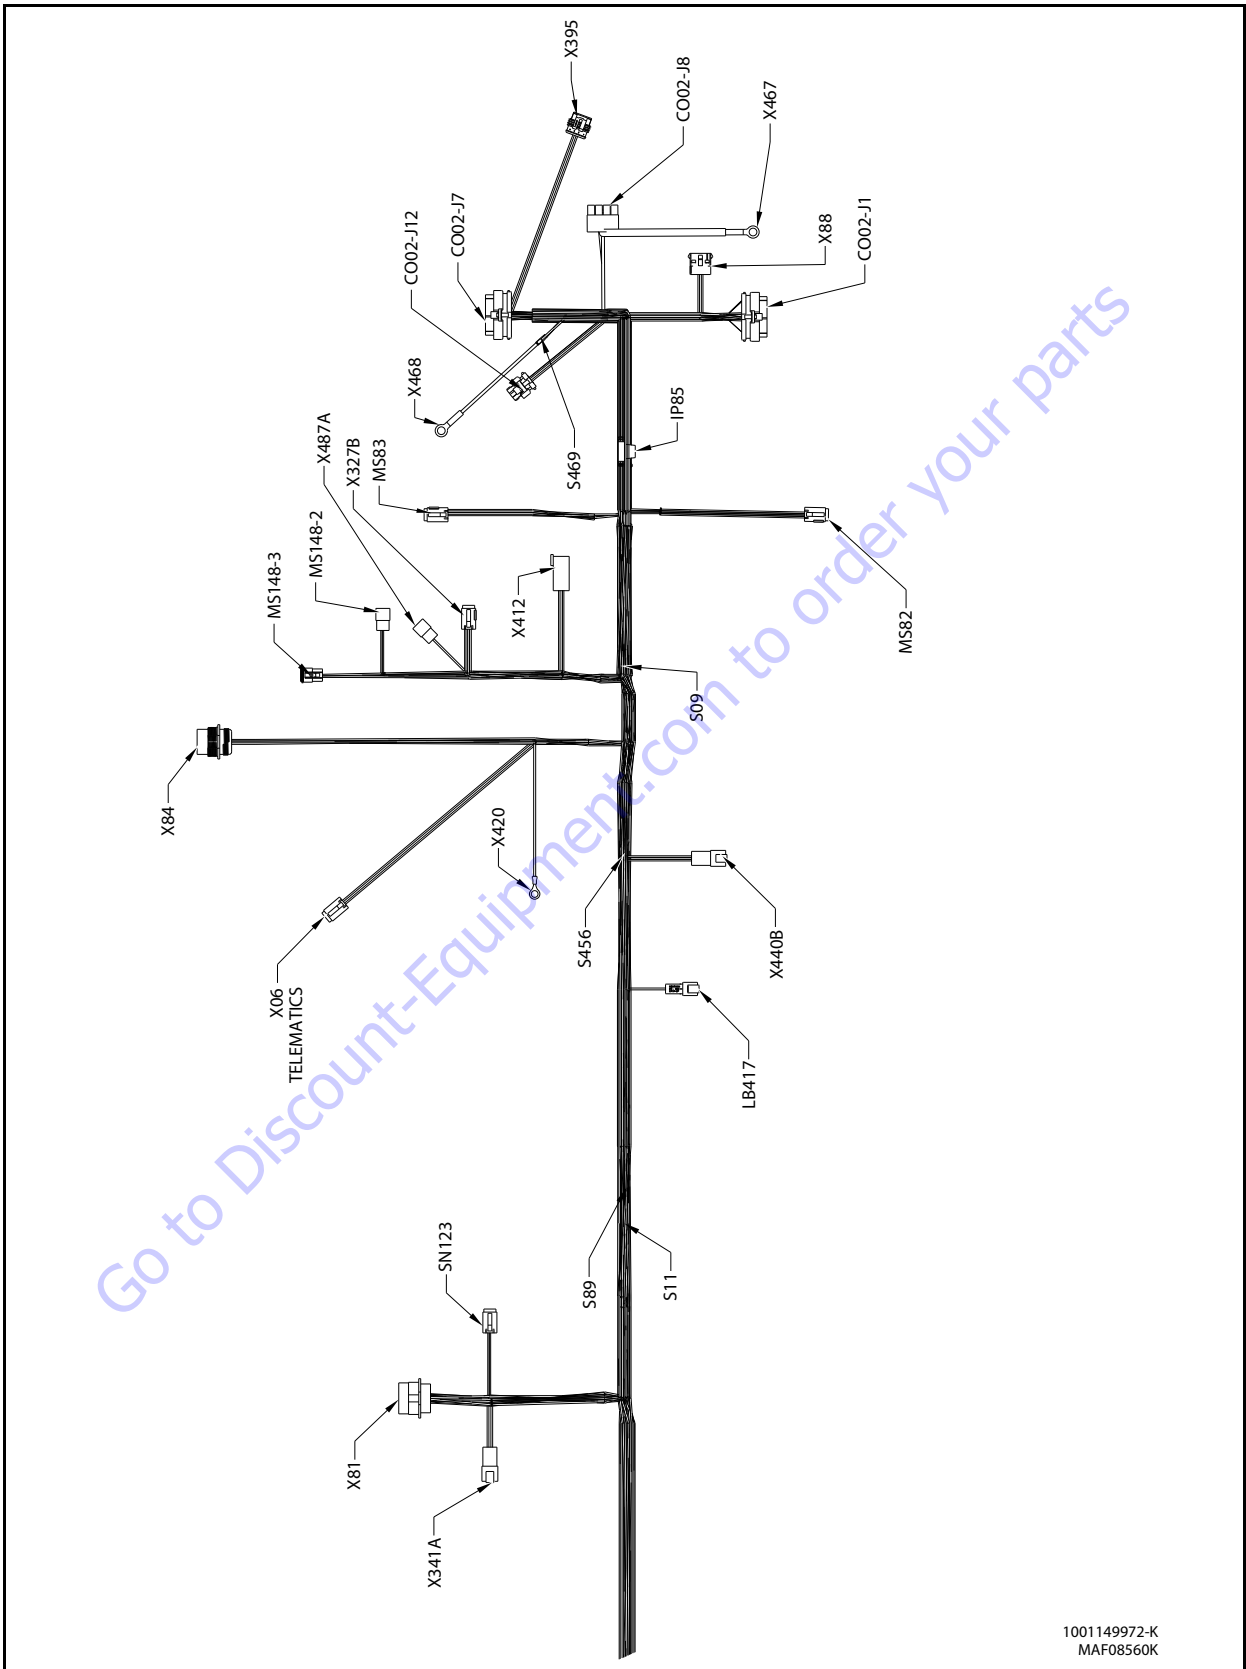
Turntable Wiring Harness - Sheet 2 of 3
